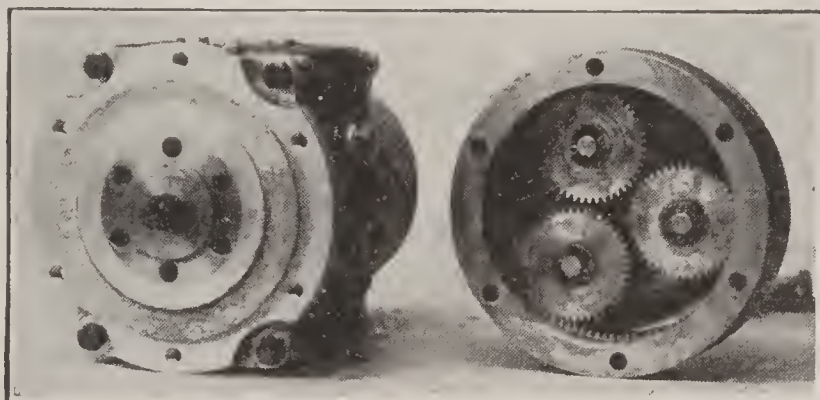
Westinghouse Starting Motor with Planetary Reduction Gear
